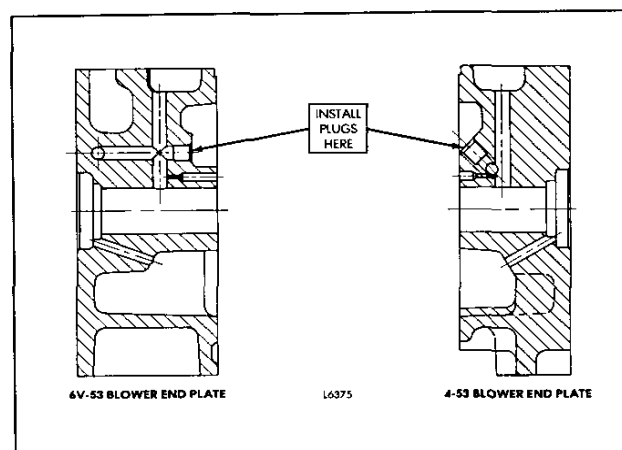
Location of Holes to be Plugged - Blower End Plates
